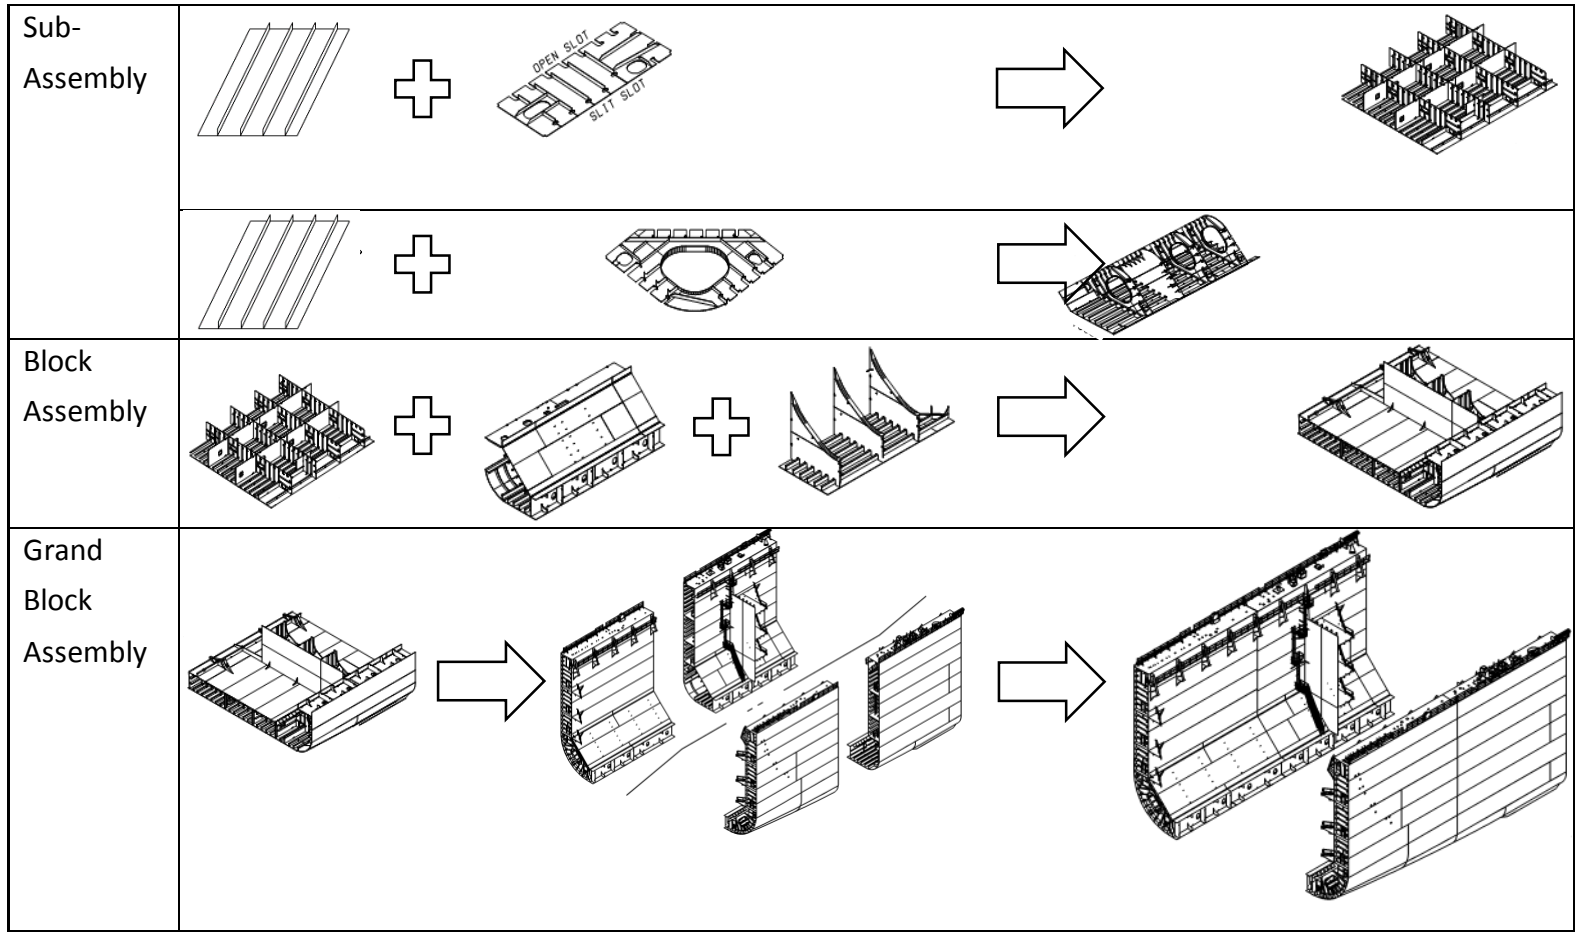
Sub-assembly and Block assembly and Grand Block assembly process
